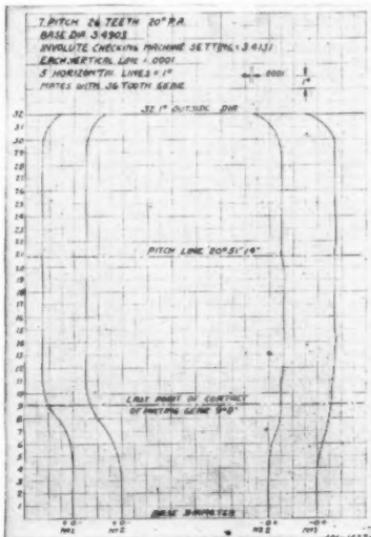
Chart plotted to show the involute profile of right and left hand surfaces of two gear teeth on a 7-pitch gear.
